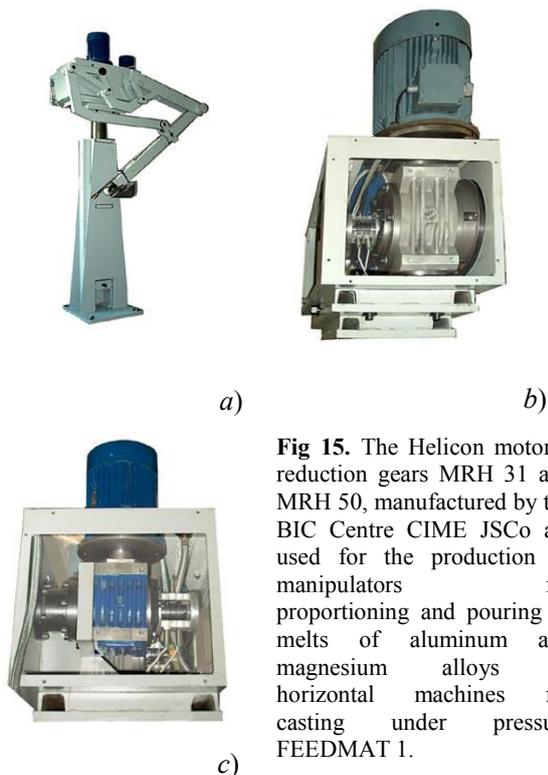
The Helicon motor – reduction gears MRH 31 and MRH 50, manufactured by the BIC Centre CIME JSCo are used for the production of manipulators for proportioning and pouring of melts of aluminum and magnesium alloys in horizontal machines for casting under pressure FEEDMAT 1.
